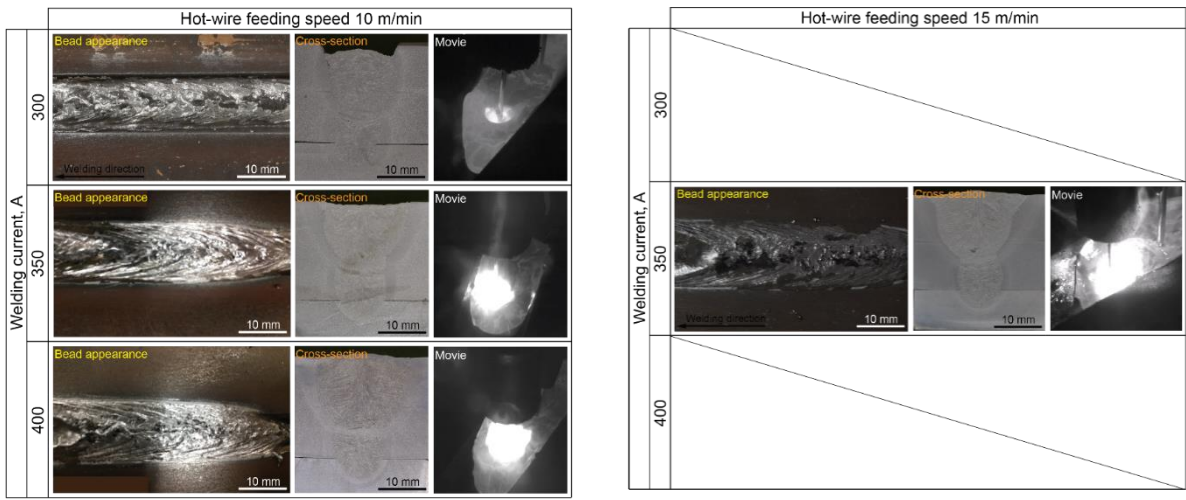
Appearances of weld beads, cross-sections and molten pool images.
